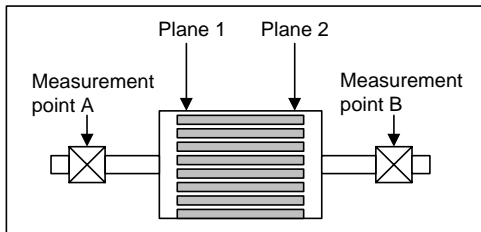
Plane and measurement points for a single squirrel cage between two bearings
